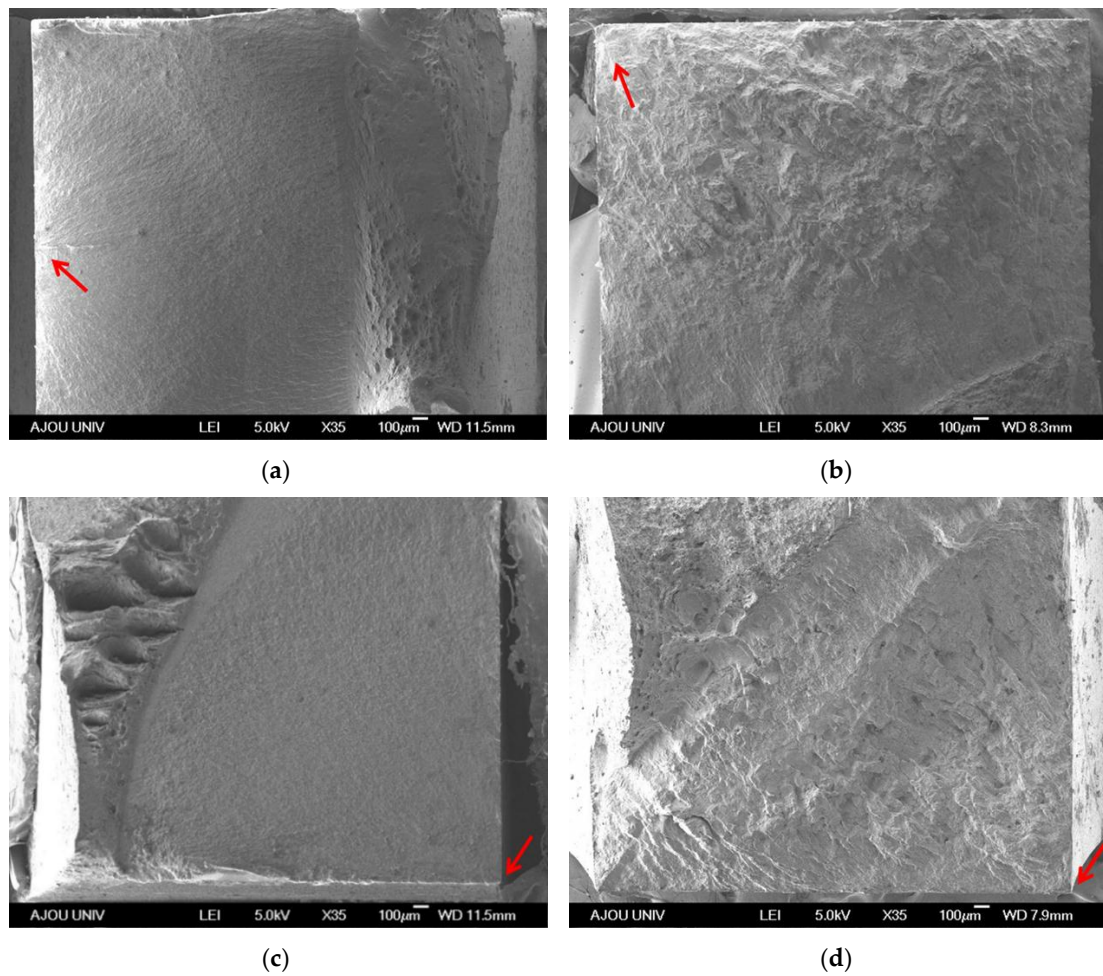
Fracture images ($\times 35$): (a) 590 FB (490 MPa, 3.53×10^7 cycles); (b) welded 590 FB steel (450 MPa, 1.50×10^7 cycles); (c) 780 FB steel (700 MPa, 1.03×10^9 cycles); and (d) welded 780 FB steel (650 MPa, 5.08×10^7 cycles).
